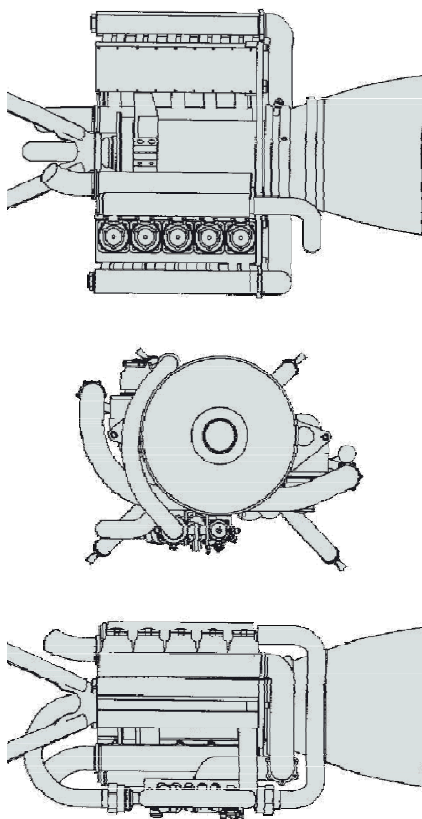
Concept Drawing of the Demonstrator HL Engine
